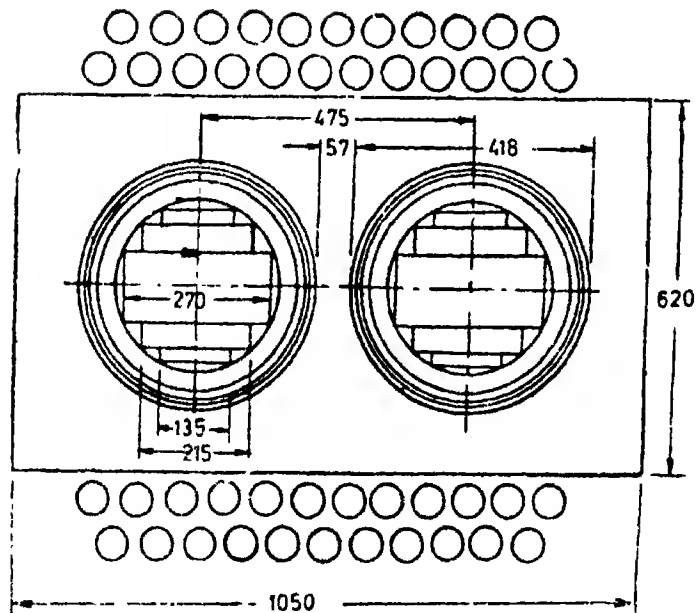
Core and winding details of 500 kVA, Single Phase 6600/400 volt, 50 Hz core type power transformer (dimensions in mm)
